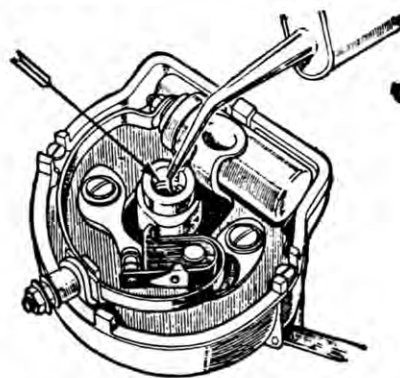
Cam bearing & shaft are oiled through cavity under rotor.
